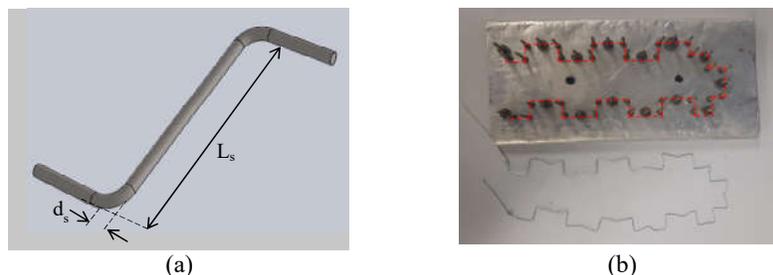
(a) Torsional SMA Z-shape torsional spring; (b) Pattern of the wire and metal jig
